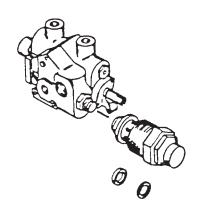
RELIEF VALVE ADJUSTMENT
